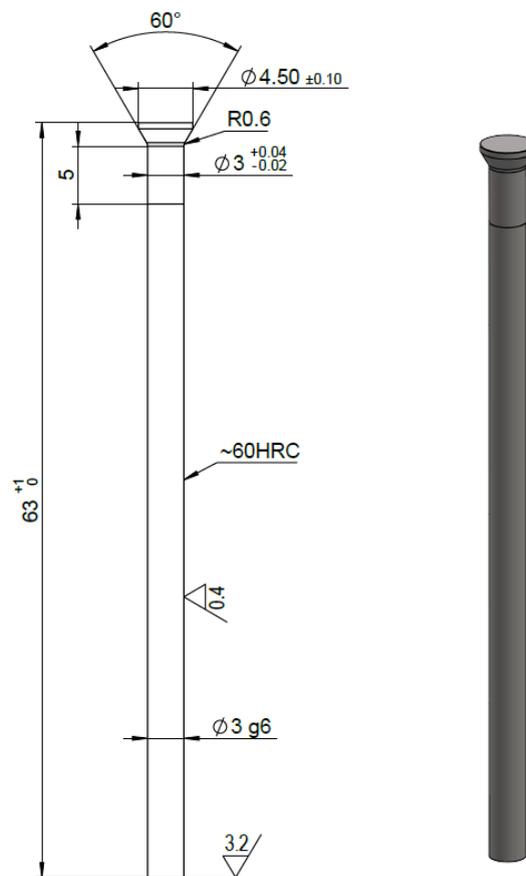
Dowel pin DP-3g6-63 dimensions
